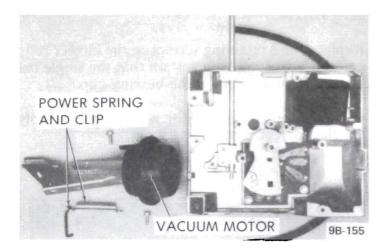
B-210 Vacuum Motor and Power Spring - Removed
